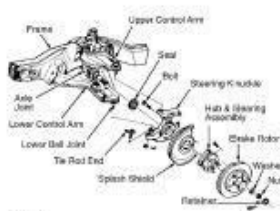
Exploded View Of Hub & Steering Knuckle Assembly (C1500 Series Shows "KC" & "LC" Series Are Similar)
